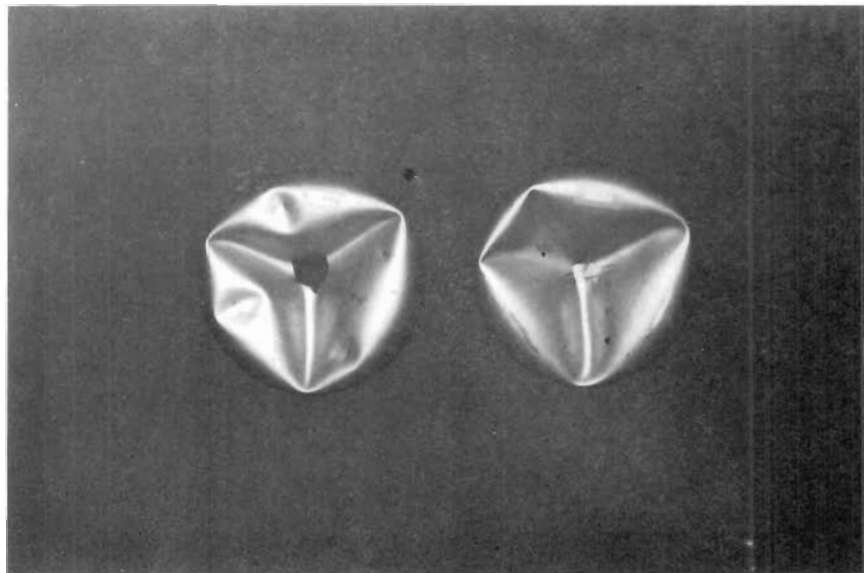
1/10 Scale Test Models, BE-4 (L) and BE-5 (R)
